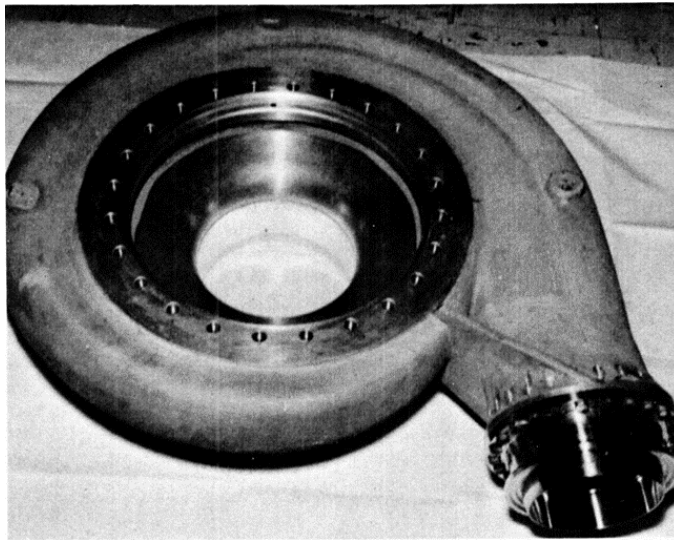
A Ti-5Al-2.5Sn fuel pump impeller used in the space shuttle main engine [27]
